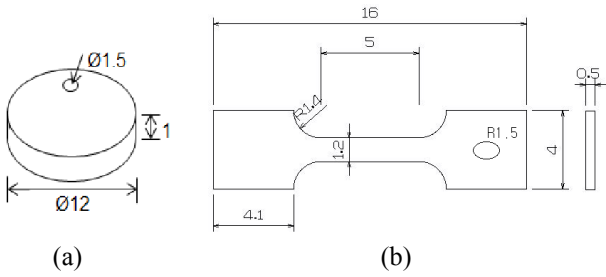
Geometry and dimensions of coupon (a) and tensile specimen (b) in mm
